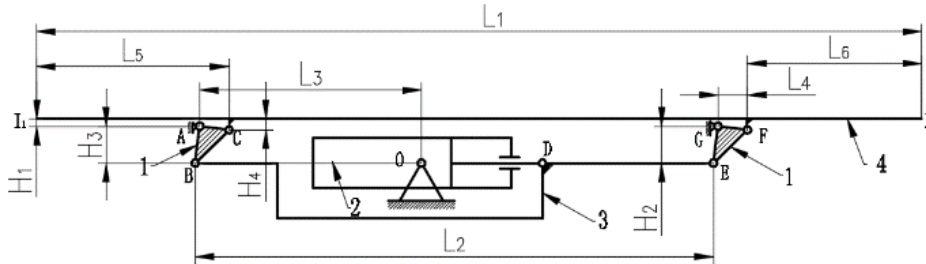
The kinematic sketch of mechanism.1 Triangular arm, 2 Electronic cylinder, 3 Push rod, 4 Support plate
